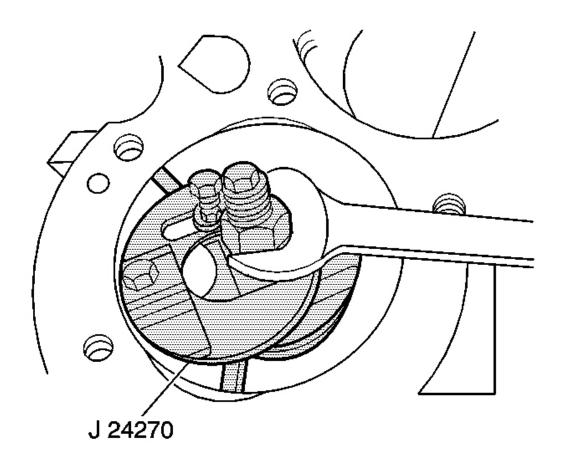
Removing Cylinder Bore Ring Ridge Courtesy of GENERAL MOTORS CORP.
